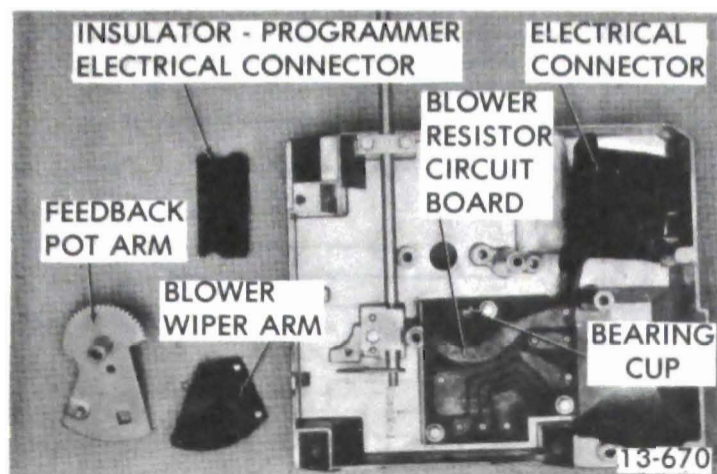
Blower Wiper Arm and Feedback Pot Arm - Removed
